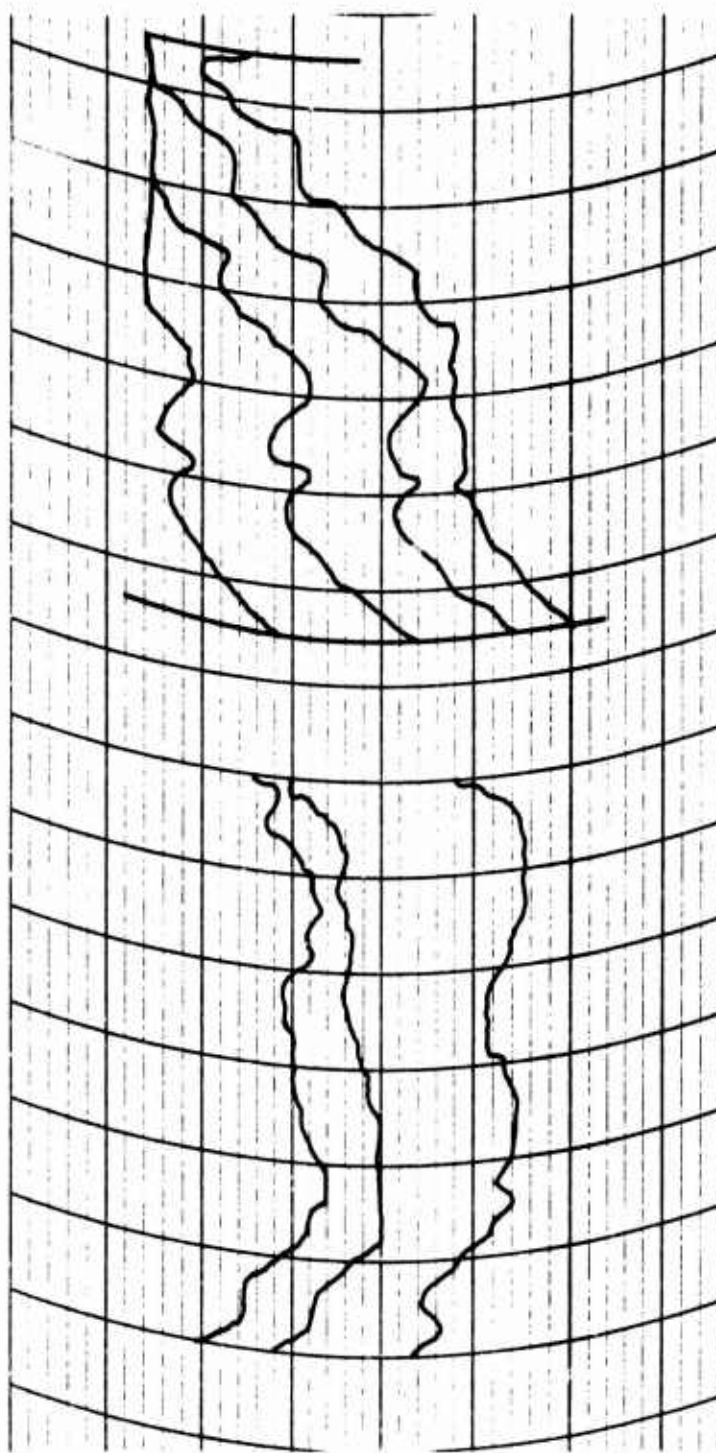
Involute Profile Chart, Typical As-Forged Gear Blank.
